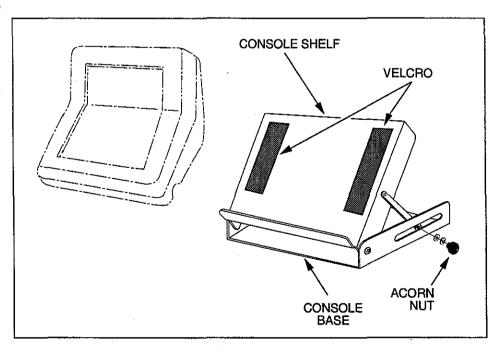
Adjustable Shelf Bracket Assembly Oriented for Horizontal Mounting
